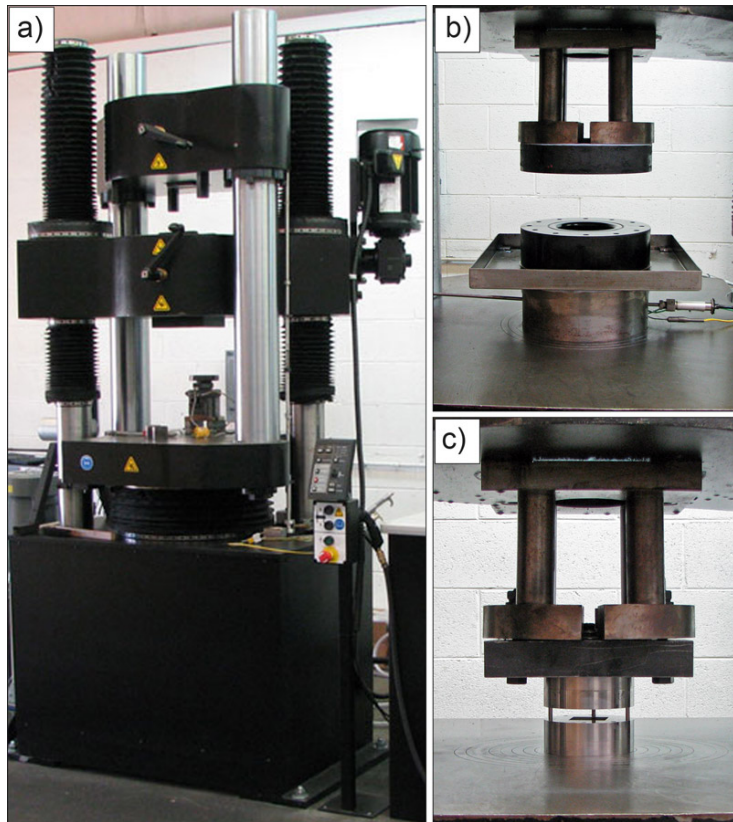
Equipment that used to form BPP samples. a) Instron Satec 5596-400HVL mechanical testing system, b) hydroforming and c) stamping setup.
